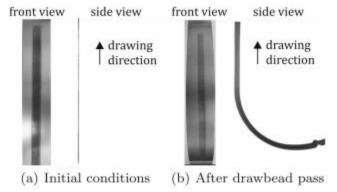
Sheet Metal Before and After a Drawbead Test [12].
